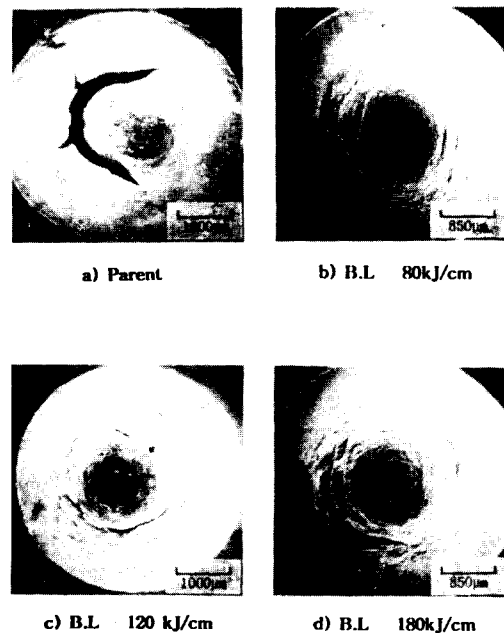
SEM macrofractographs for weld joint of TMCP AH36 steel in air
